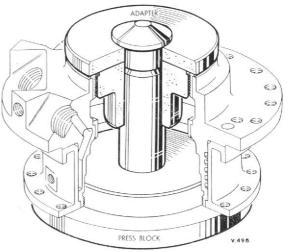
Pressing labyrinth bush into rear bearing housing with adapter T.78133 and press block T.78134.
